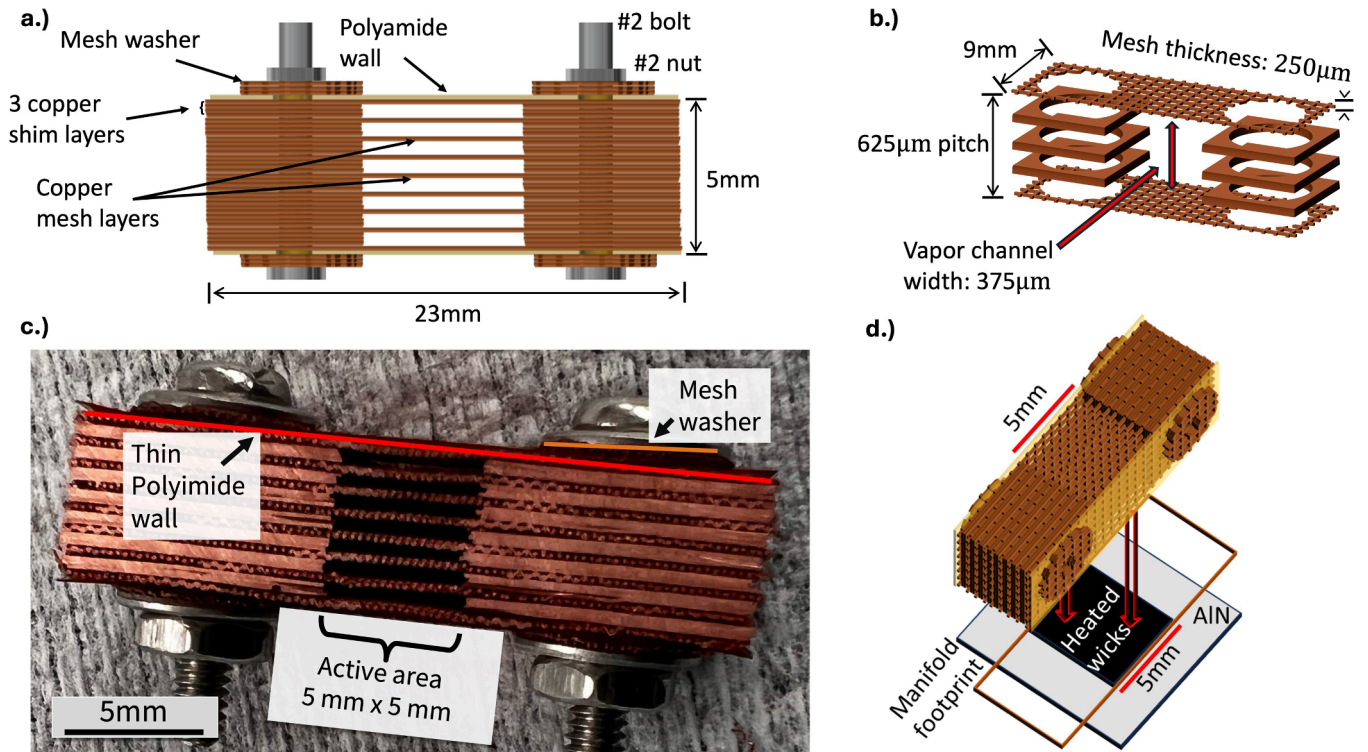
Manifold construction a.) Top view schematic of assembled manifold. b.) Mesh and spacer configuration. c.) Assembled manifold as viewed from bottom (wick contact surface). Note planar polished bottom surface assuring uniform contact with the heated wick. d.) Schematic of copper mesh manifold showing the orientation above the heated wicking surface.
